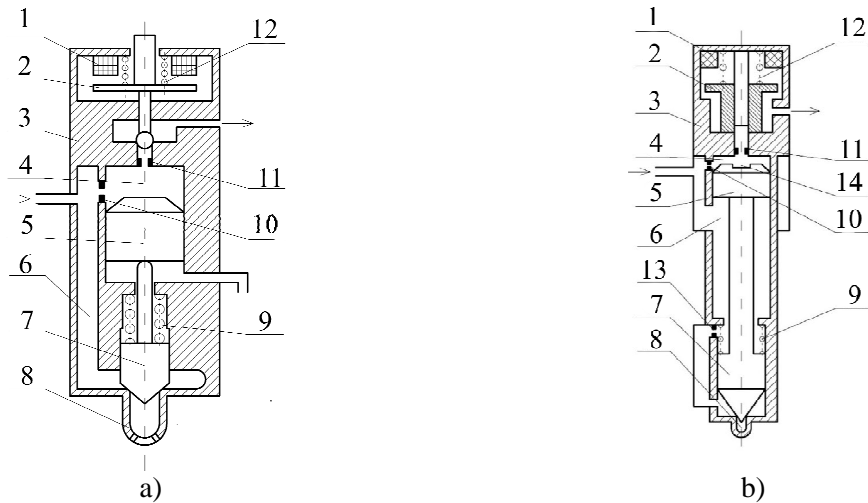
Layouts of the injectors: a – injector No1, b – injector No2;
